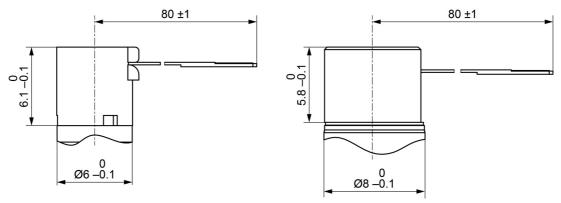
Dimensional Drawings [mm] – ENX 6 OPT (left) / ENX 8 OPT (right)
